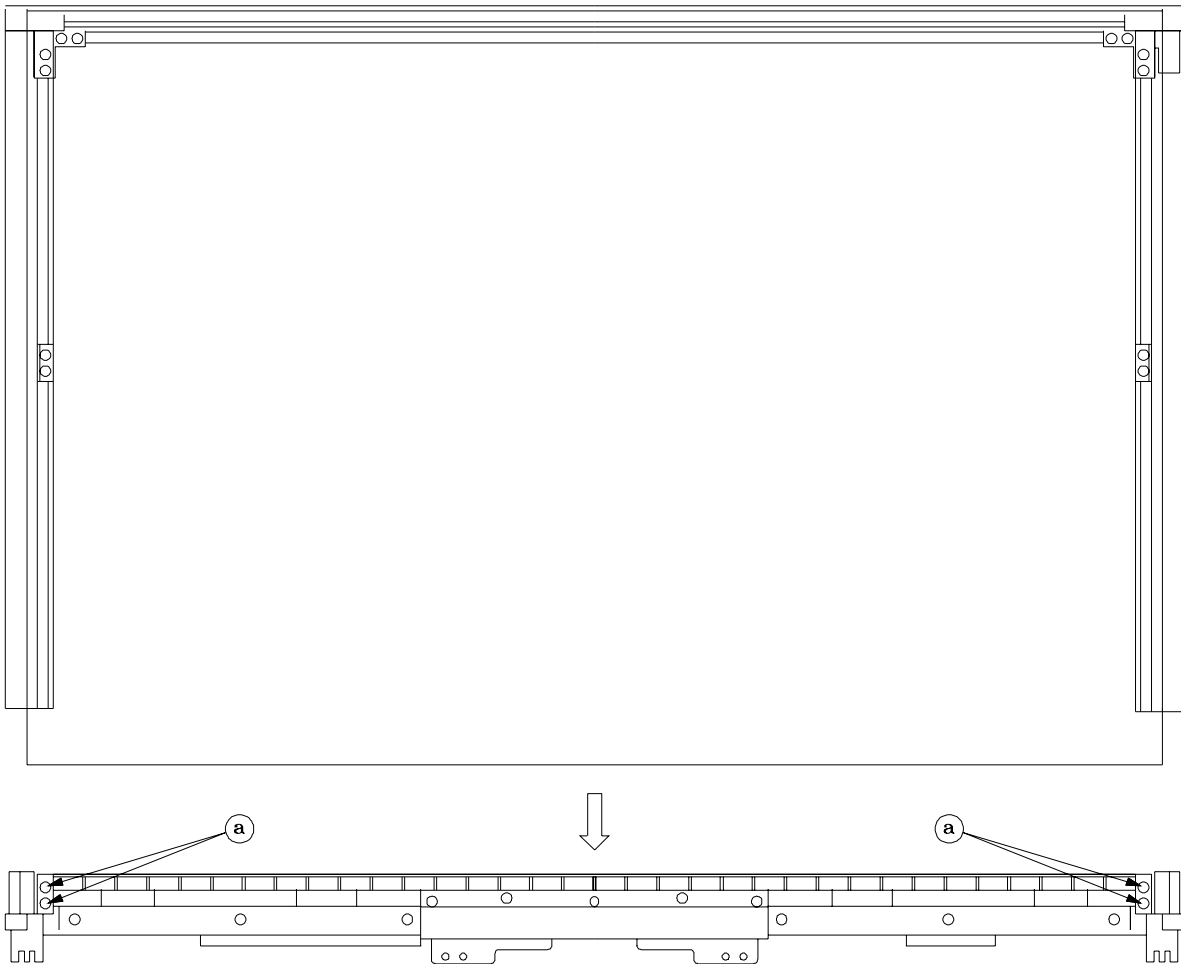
SCREEN-FRAME-BOTTOM Removal (Rear View)
